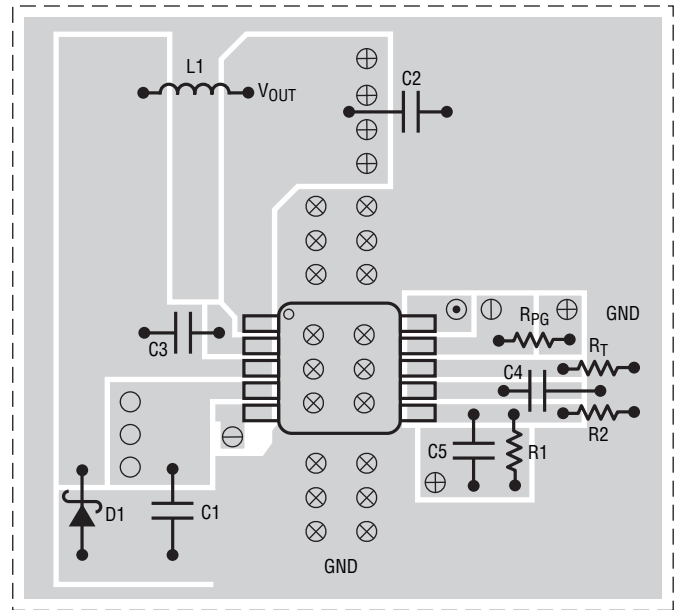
A Good PCB Layout Ensures Proper, Low EMI Operation
